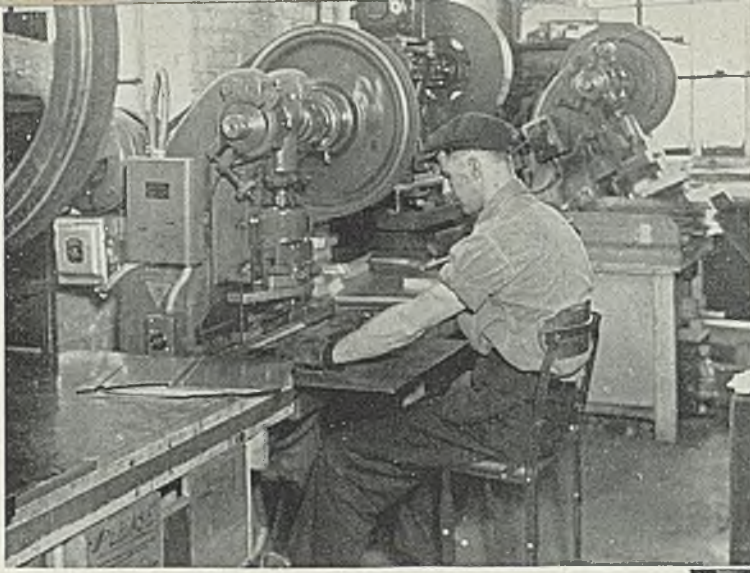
This is start of the drawer production line—a series of punch press and welding operations. Fig. 2—End of drawer production line shown below—assembling backs of drawers in place by spot welding
